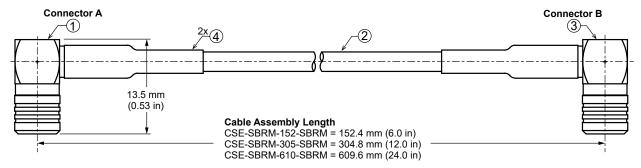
Product Dimensions for the CSE-SBRM-ccc-SBRM Cable Assembly
